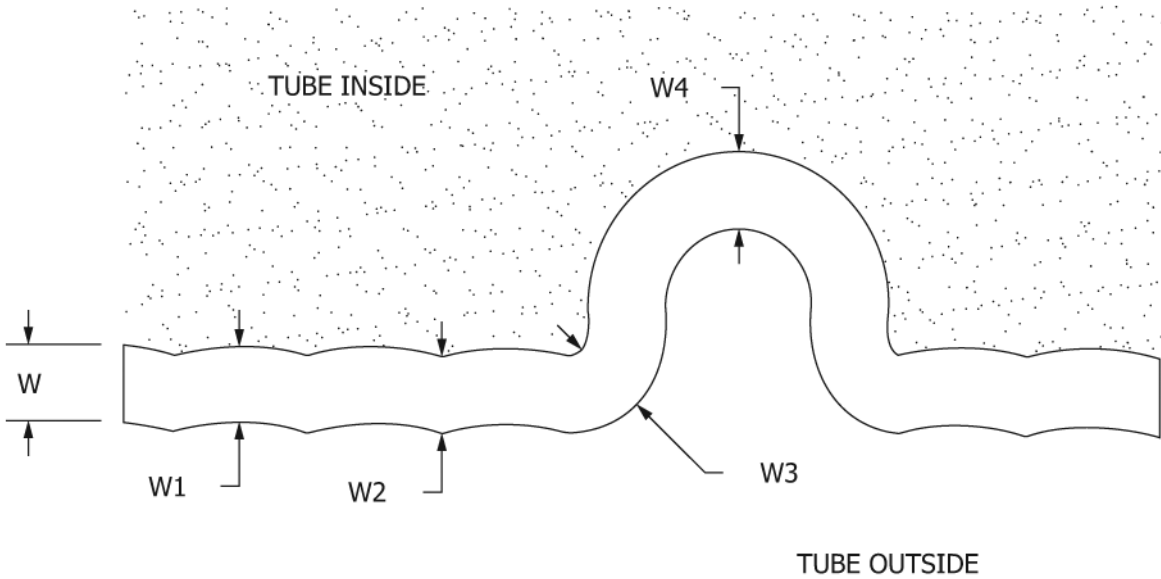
Details Regarding Wall Thickness of Representative Sample Geometry of Patterns Used to Texture Flat Strip Material before it is Used to Create Welded Tube
